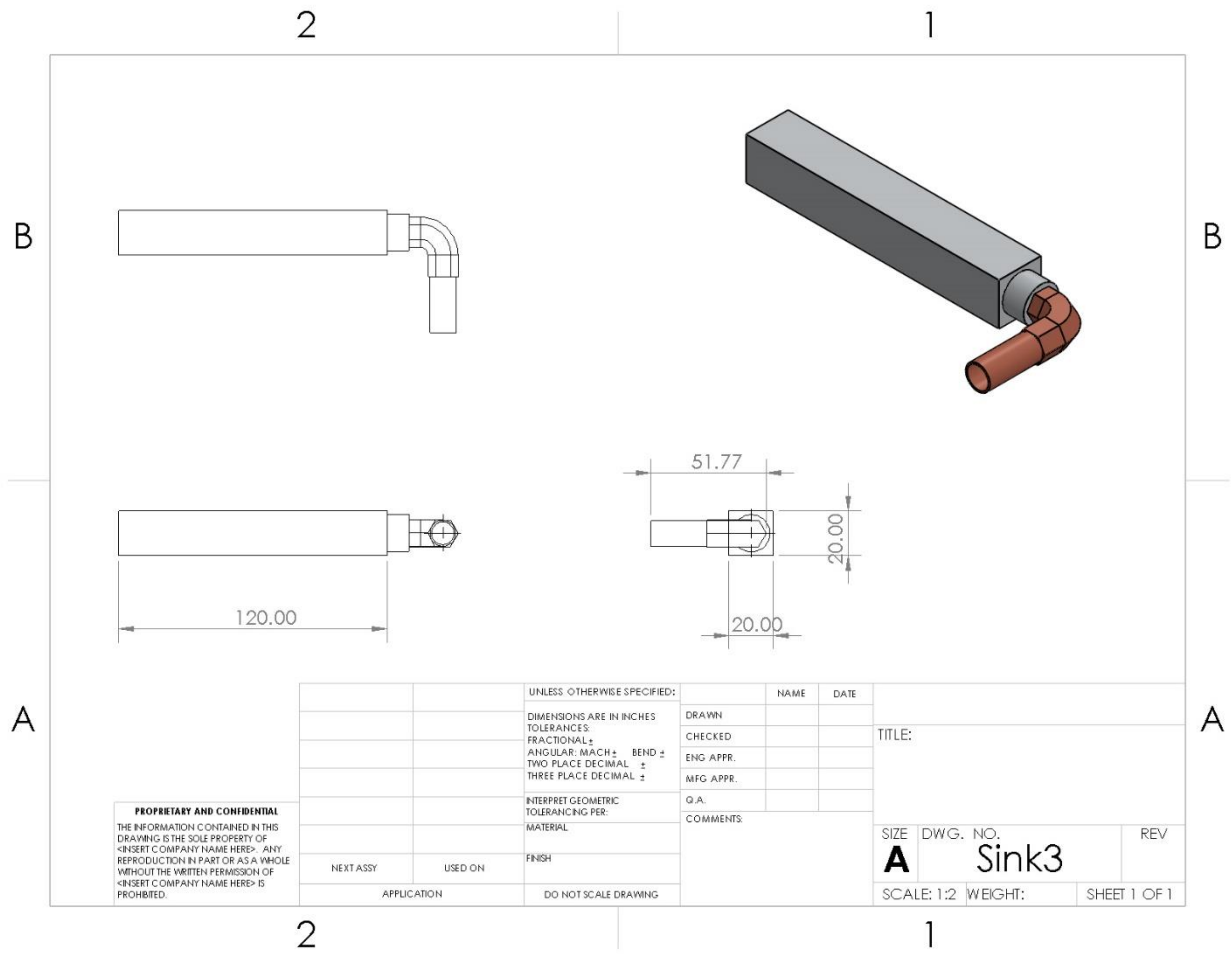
CAD Design for Heat Sink Inlet/Outlet
